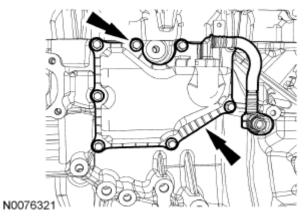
Locating Bolts And Crankcase Vent Oil Separator Courtesy of FORD MOTOR CO.
